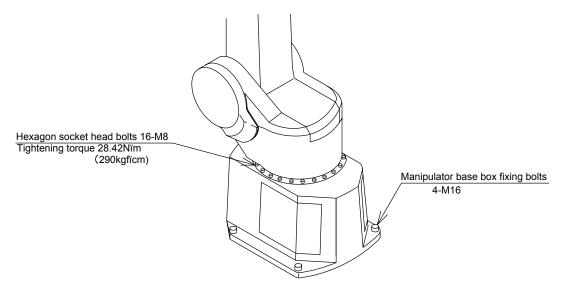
Manipulator Base Box and Bearing Fixing Bolts
